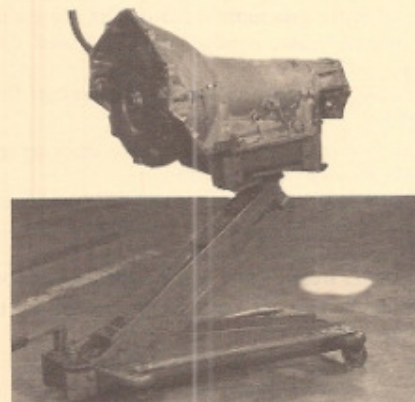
LOWER TRANSMISSION — Carefully maneuver the transmission with the torque converter rearward approximately 4". Lower transmission and torque converter.
